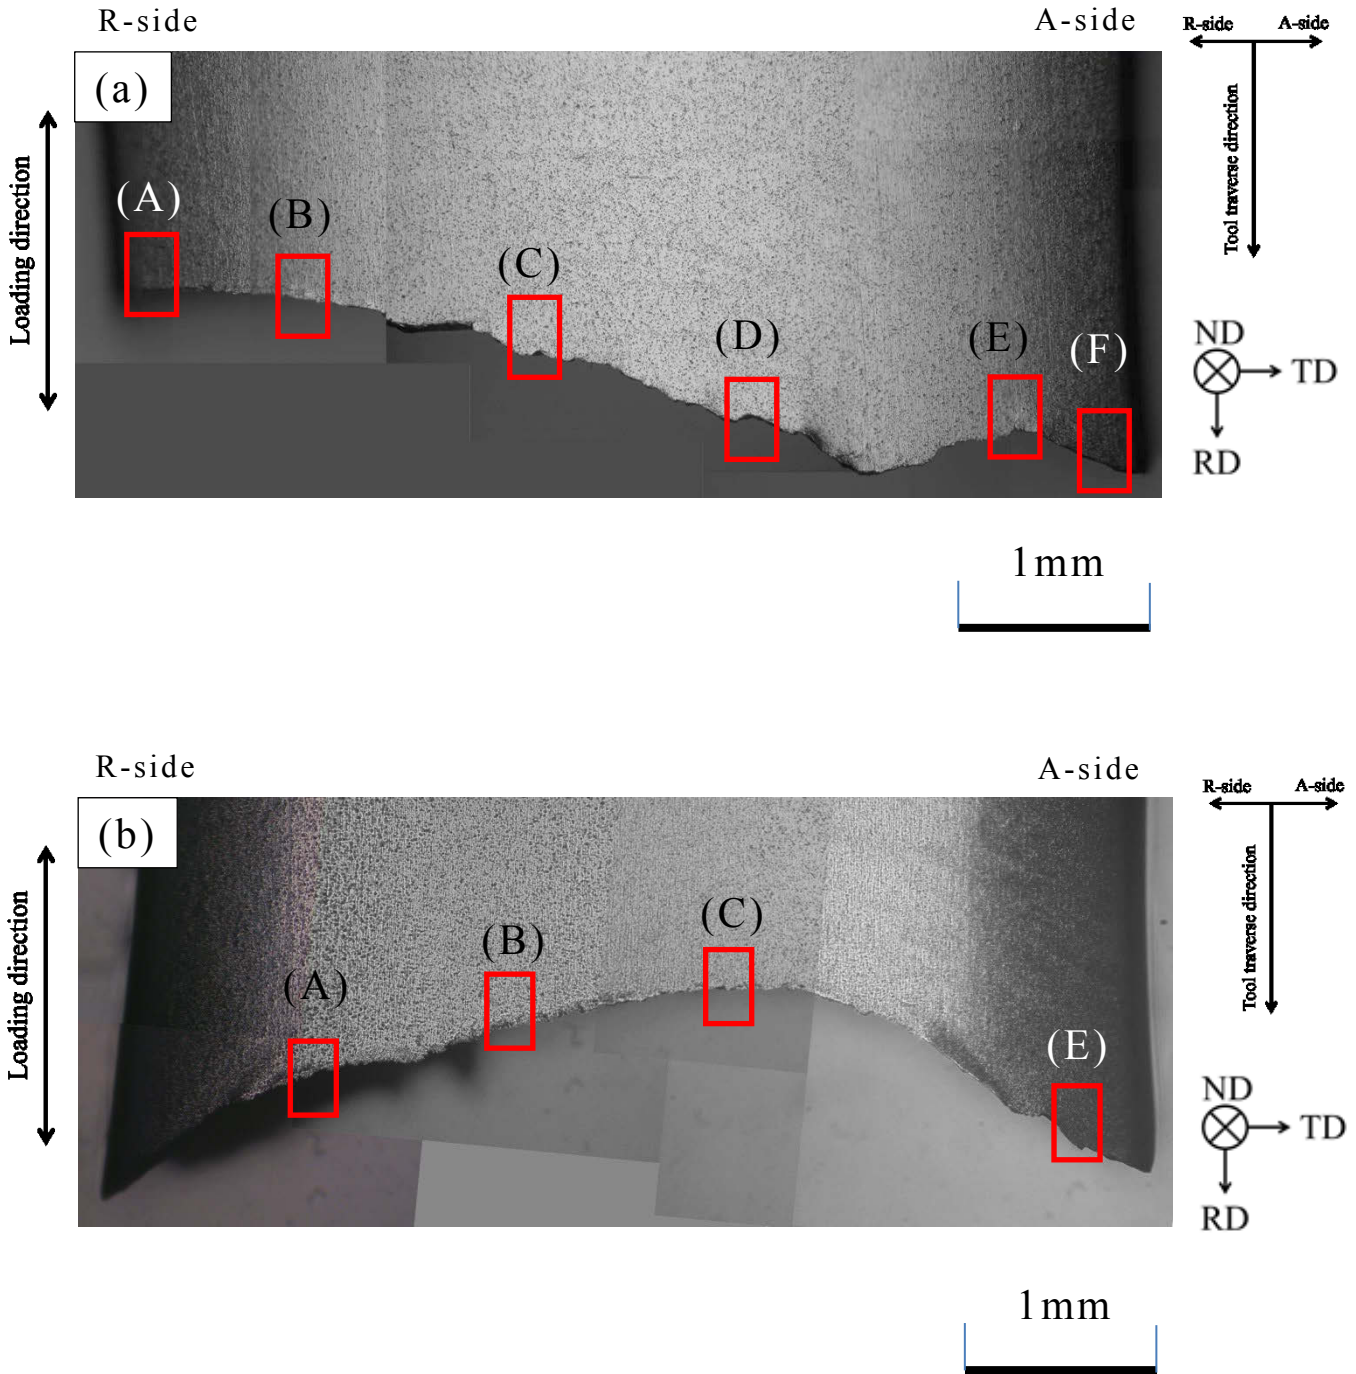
Macrographs showing region indicated by rectangle in fatigue fractured specimen: (a)L specimen, (b)H specimen.
